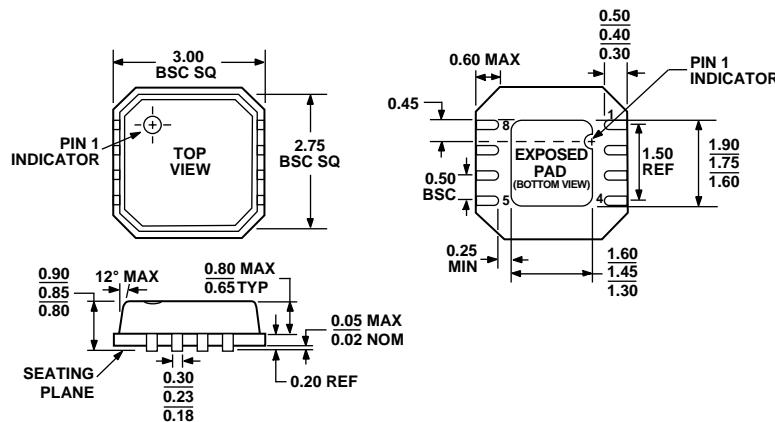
8-Lead Lead Frame Chip Scale Package [LFCSP], 3 mm × 3 mm Body (CP-8-2)—Dimensions shown in millimeters
